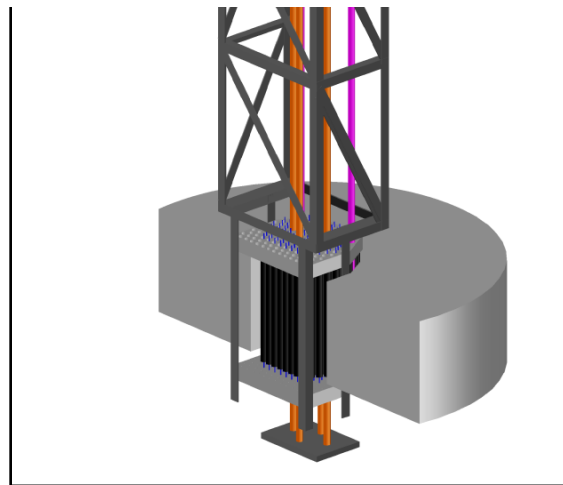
3D CAD drawing of the new core-moderator assembly and tower design.
